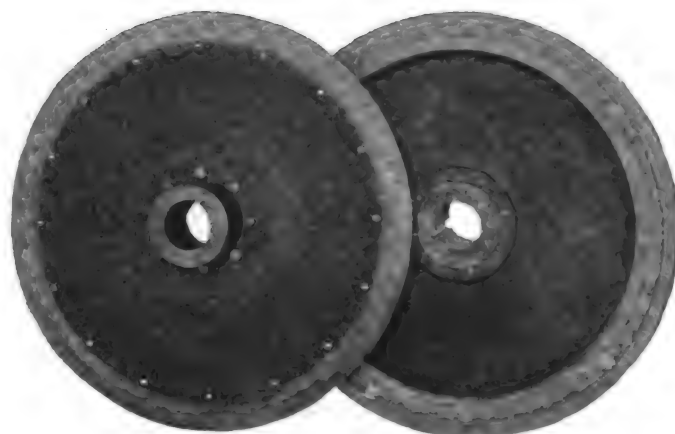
PARTS OF MAGNETIC COUPLING.
